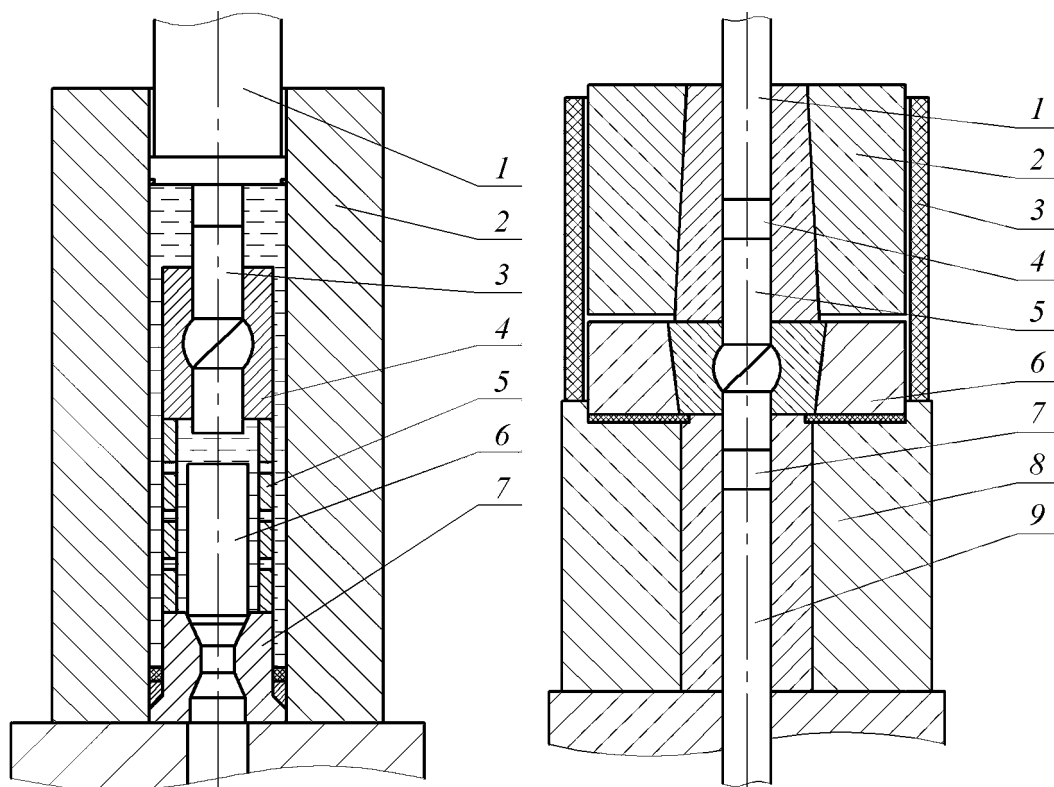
Scheme of the first tool set for the hydromechanical twist extrusion
